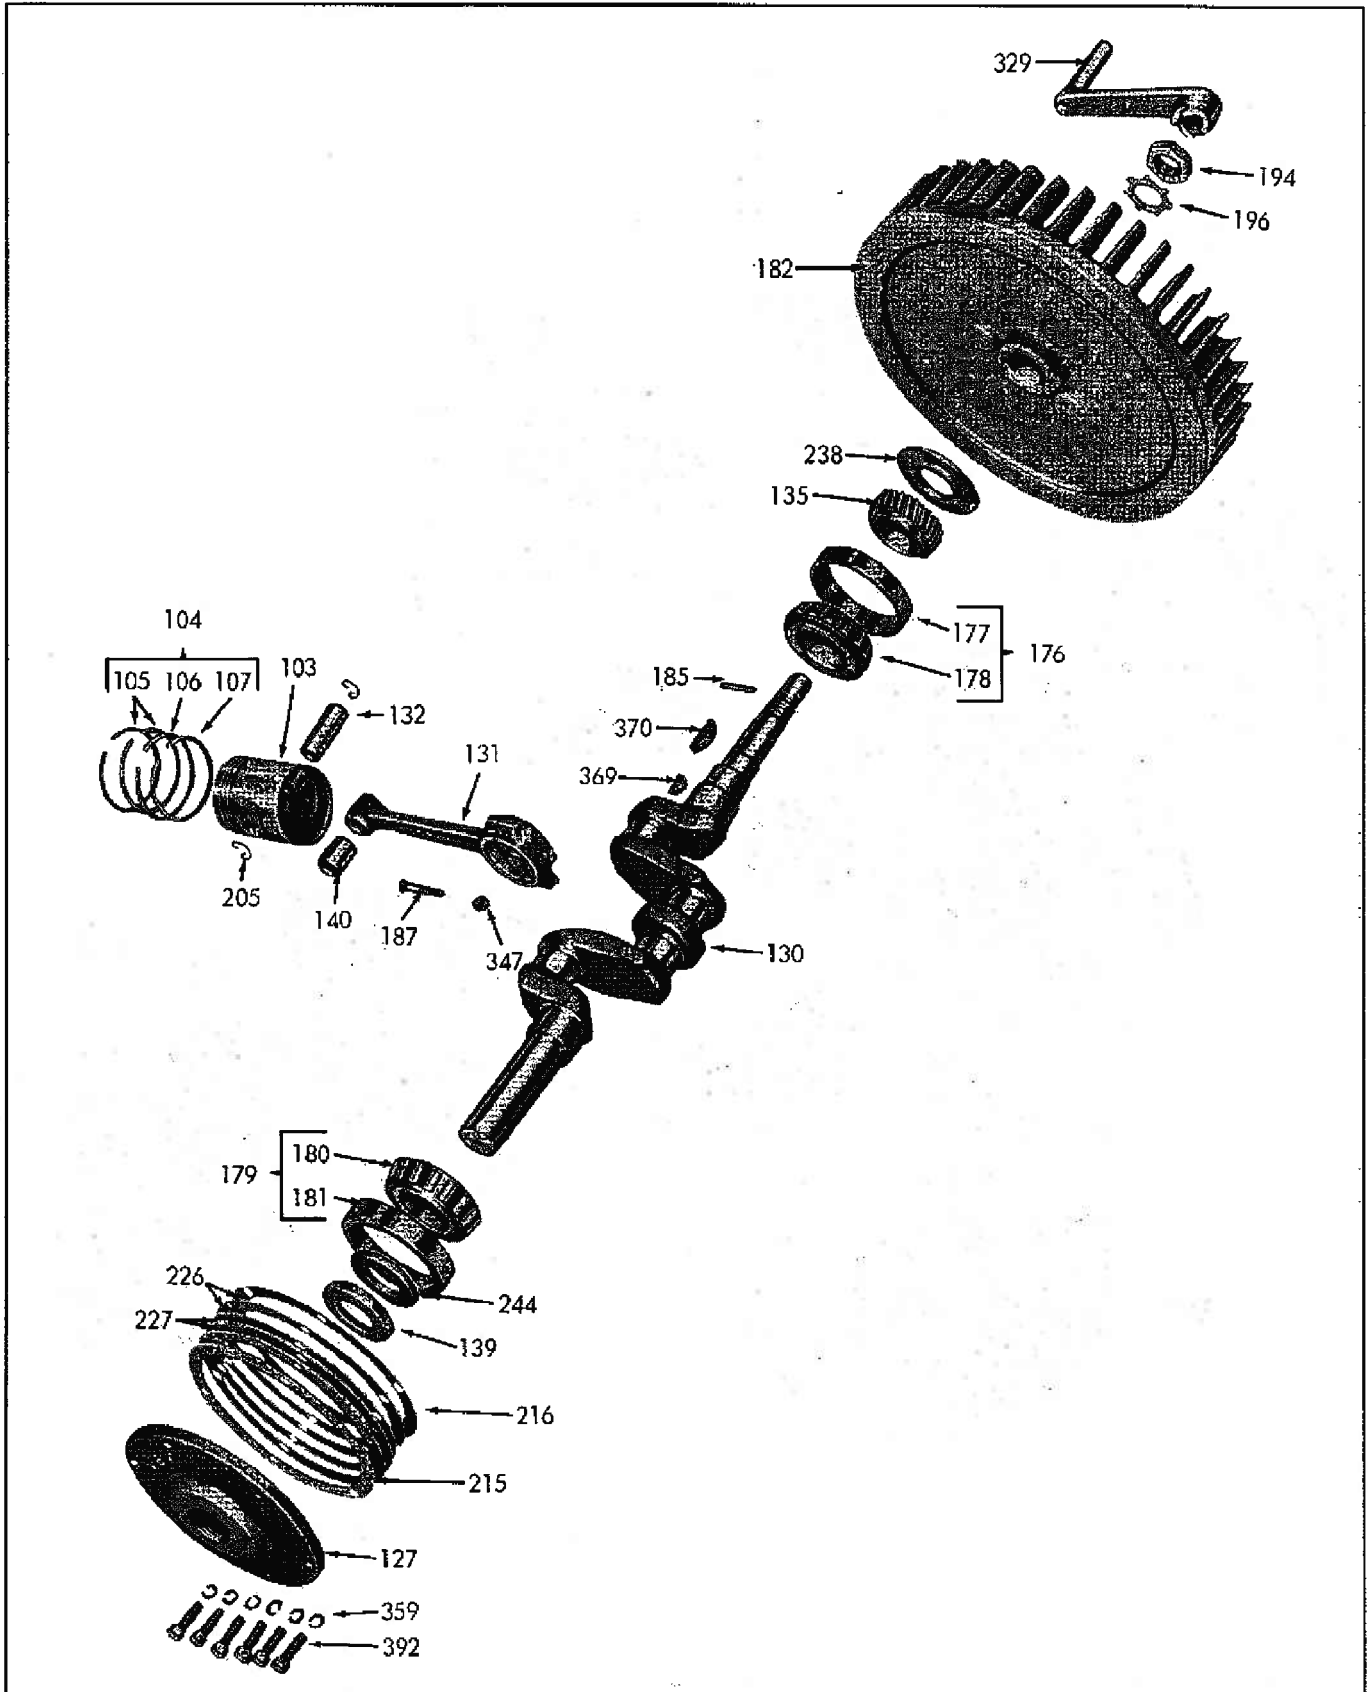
, CRANKSHAFT, PISTON AND CONNECTING ROD GROUP
